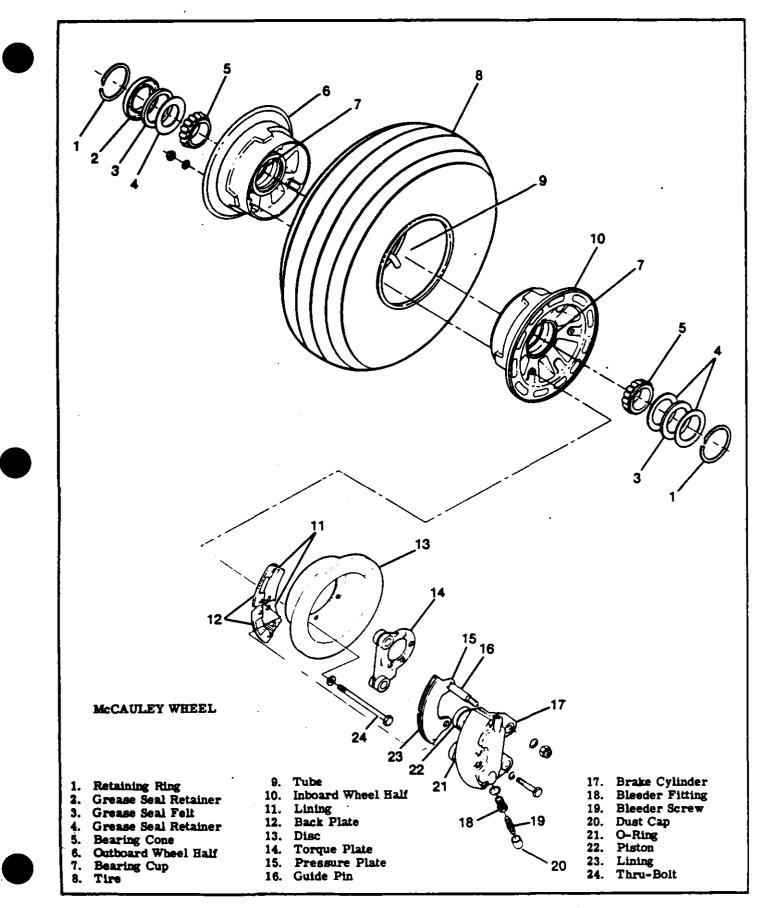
Main Wheel and Tire Assembly (Sheet 3 of 3)
